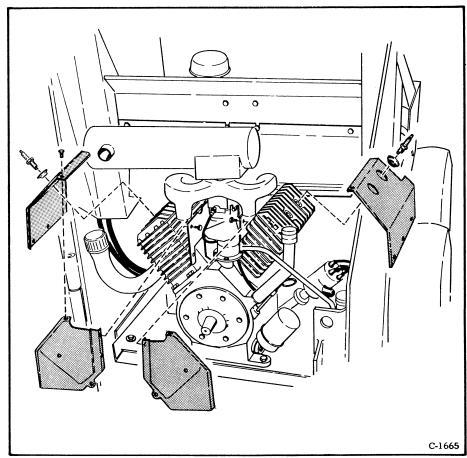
Removal of Cylinder Head Covers & Shrouding
